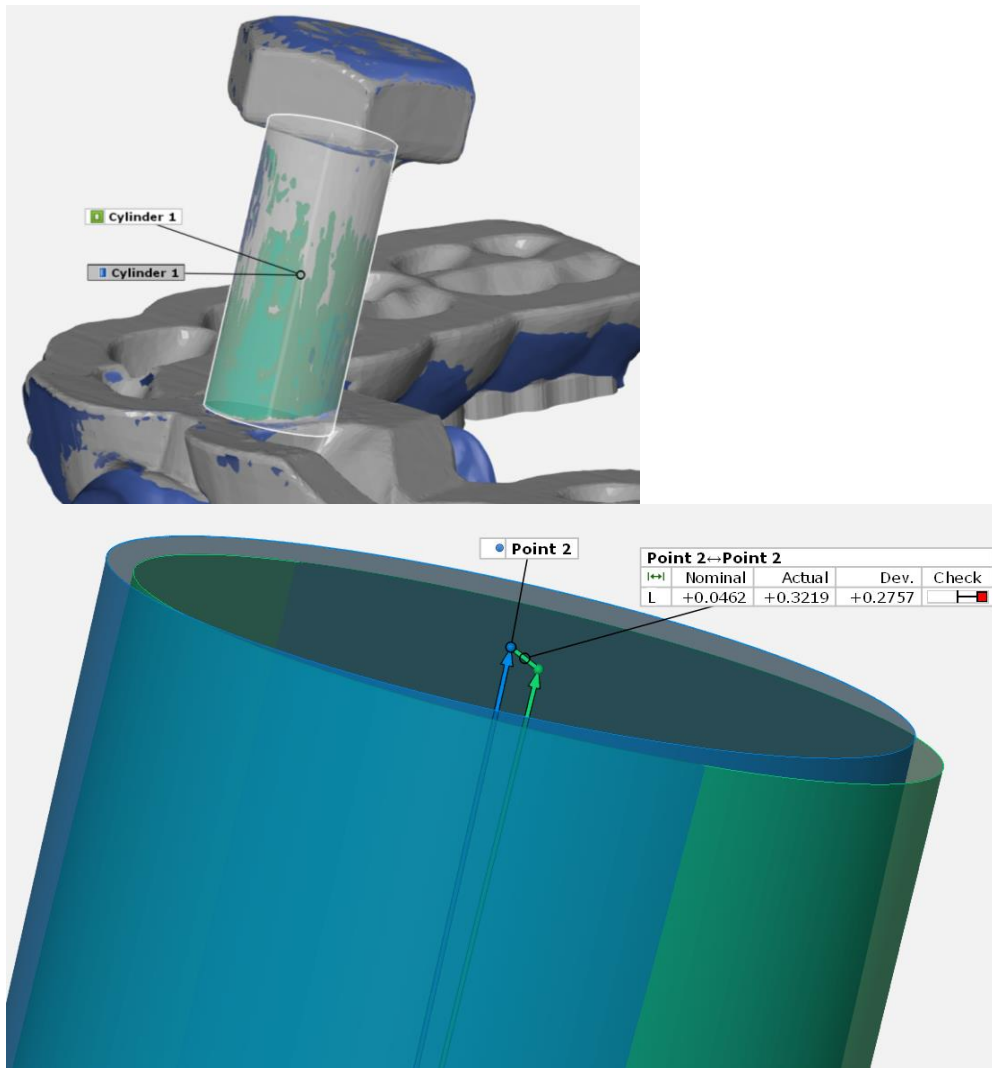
3D printed surgical guide with stainless-steel bolt secured in the guide tube.
